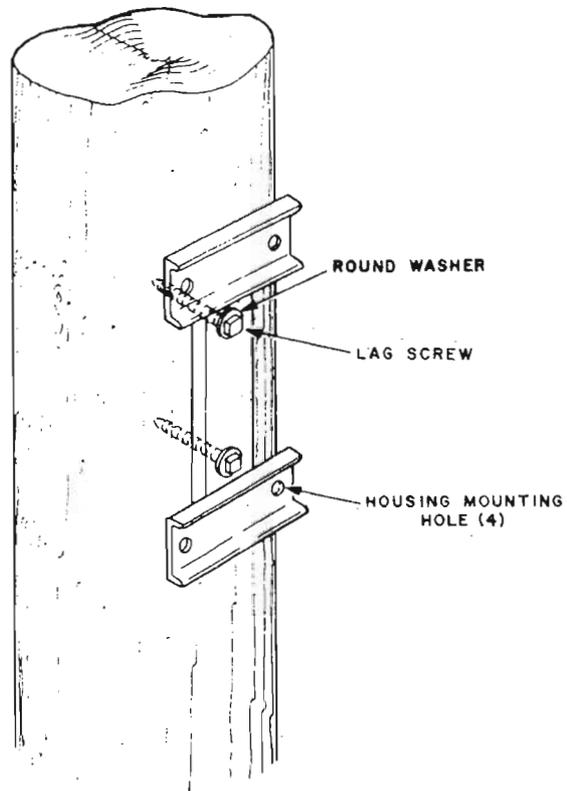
Lag Screw and Washer Mounting Method for Wood Pole.
